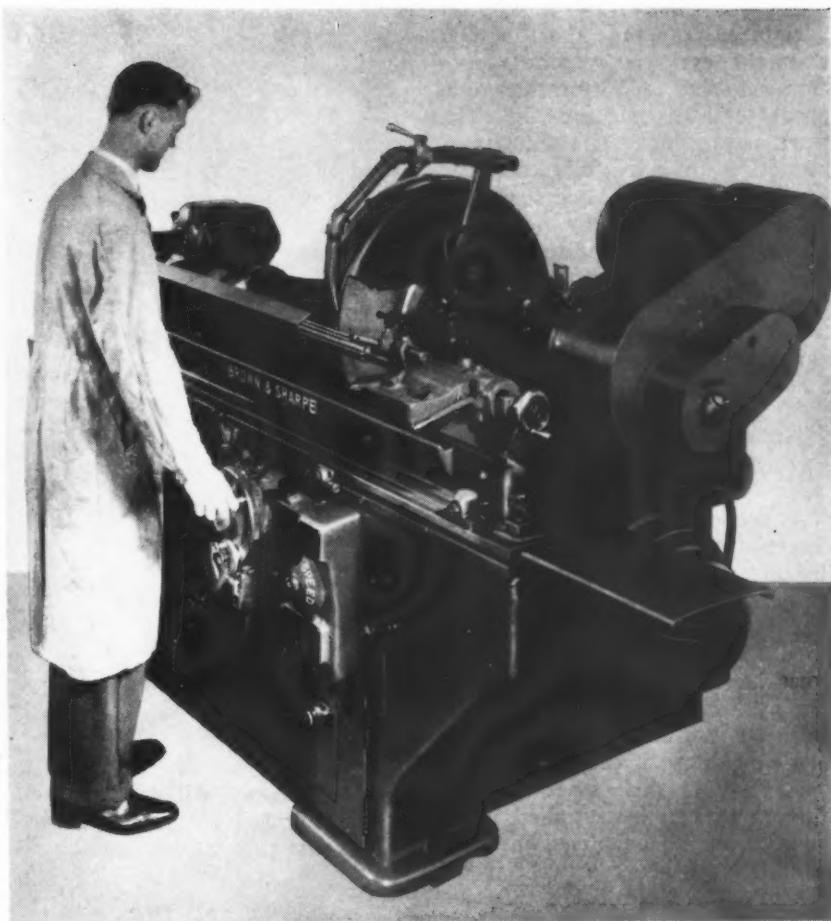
B. & S. No. 22 plain grinding machine equipped with automatic-cycle and spark-timing arrangement
